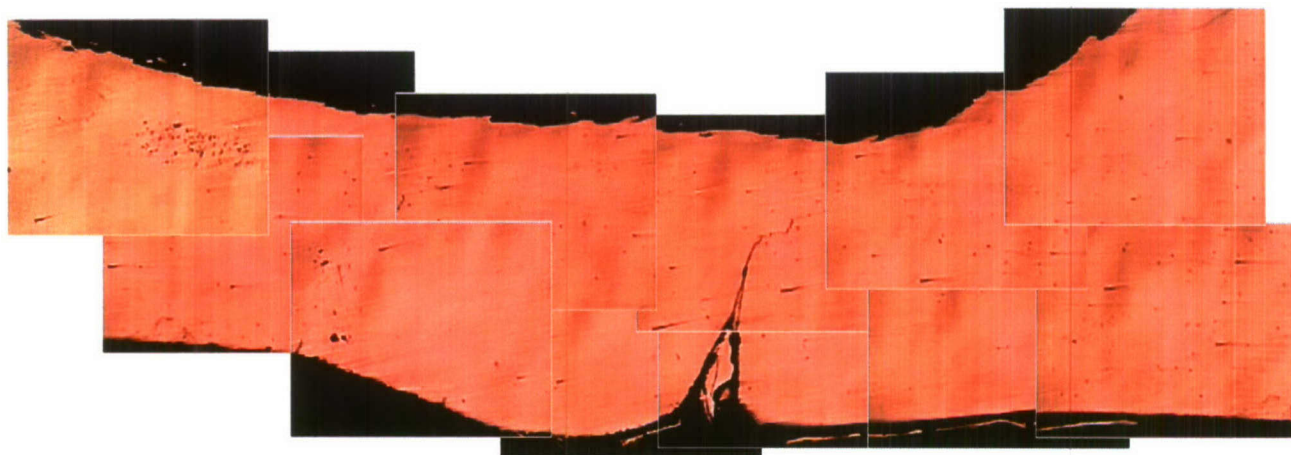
EAFSW weld cross-section of mild steel plates with 1/2-in Ta tool. Scale: ~15X
